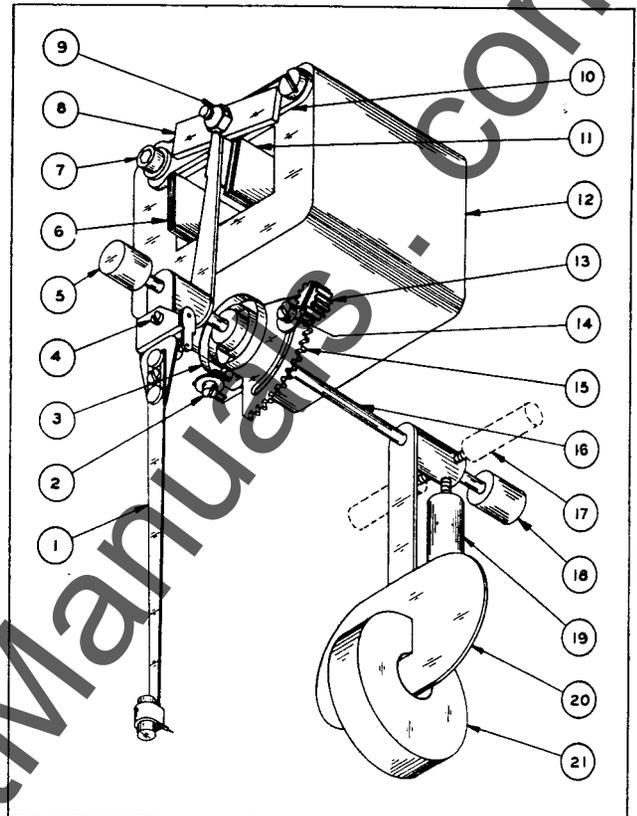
ISOMETRIC VIEW OF MOVING IRON ELEMENT
